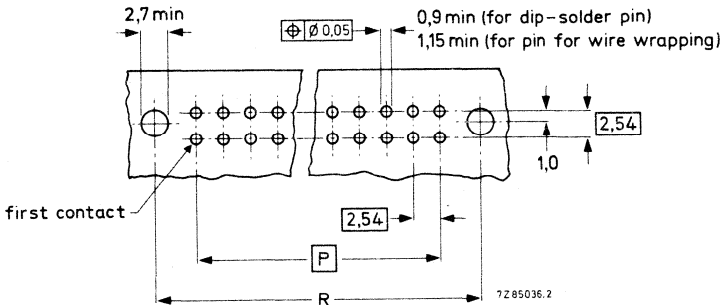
Hole pattern for male headers with 90°-angled dip-solder pins or 90°-angled pins for wire wrapping; for dimensions P and R see Table 10.
